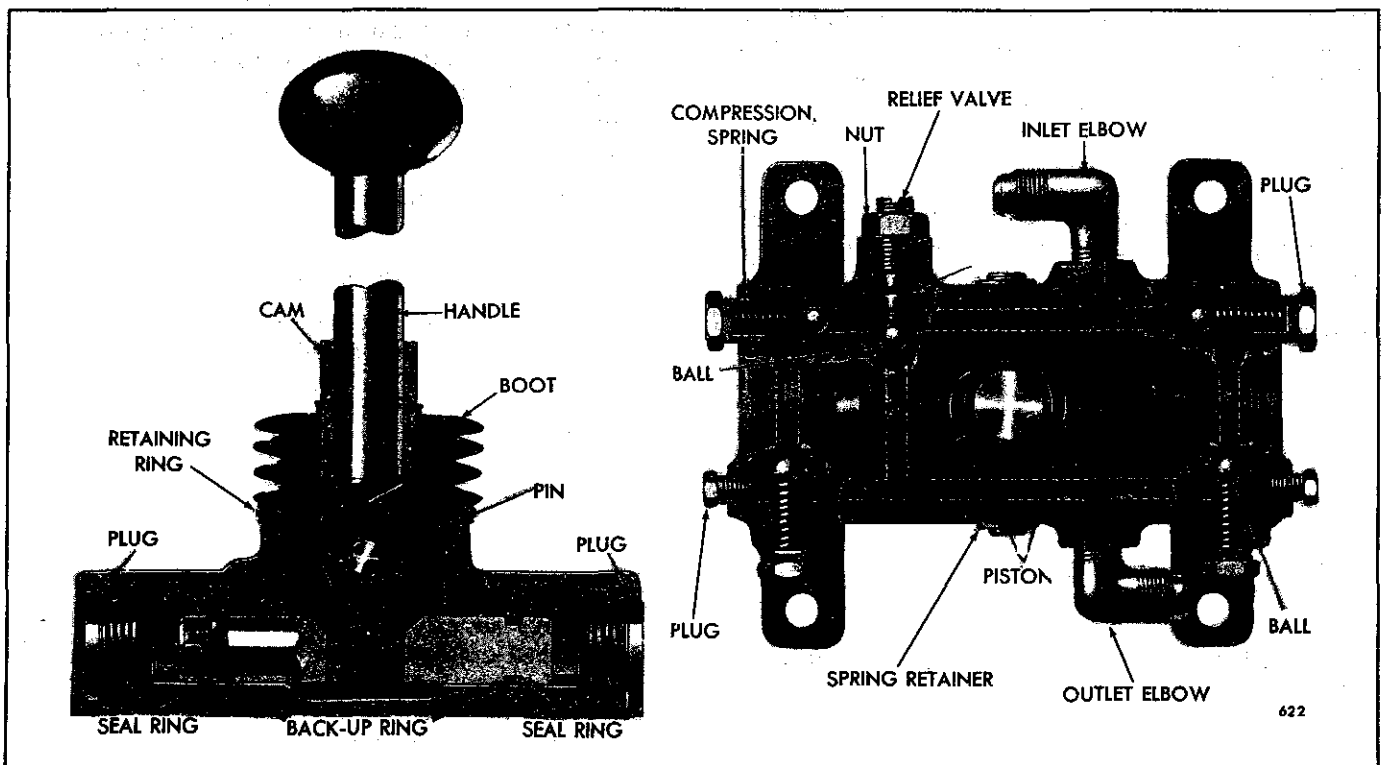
Cross Sections of Hydrostarter Hand Pump
